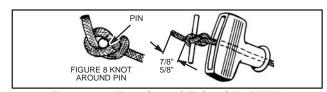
TYING KNOT ON STARTER HANDLE PIN
